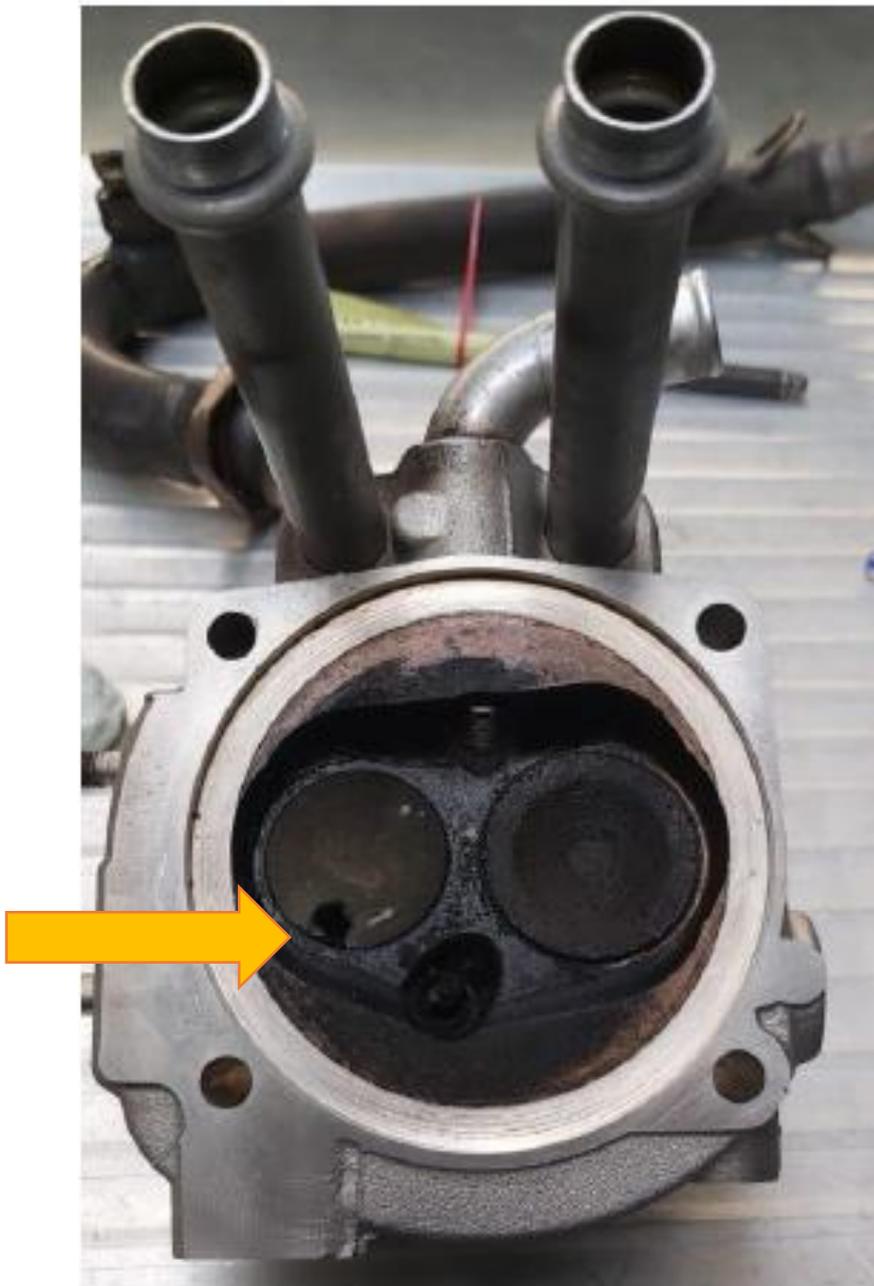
Head of the right-engine cylinder no. 2. Visible burnout of the exhaust valve.
